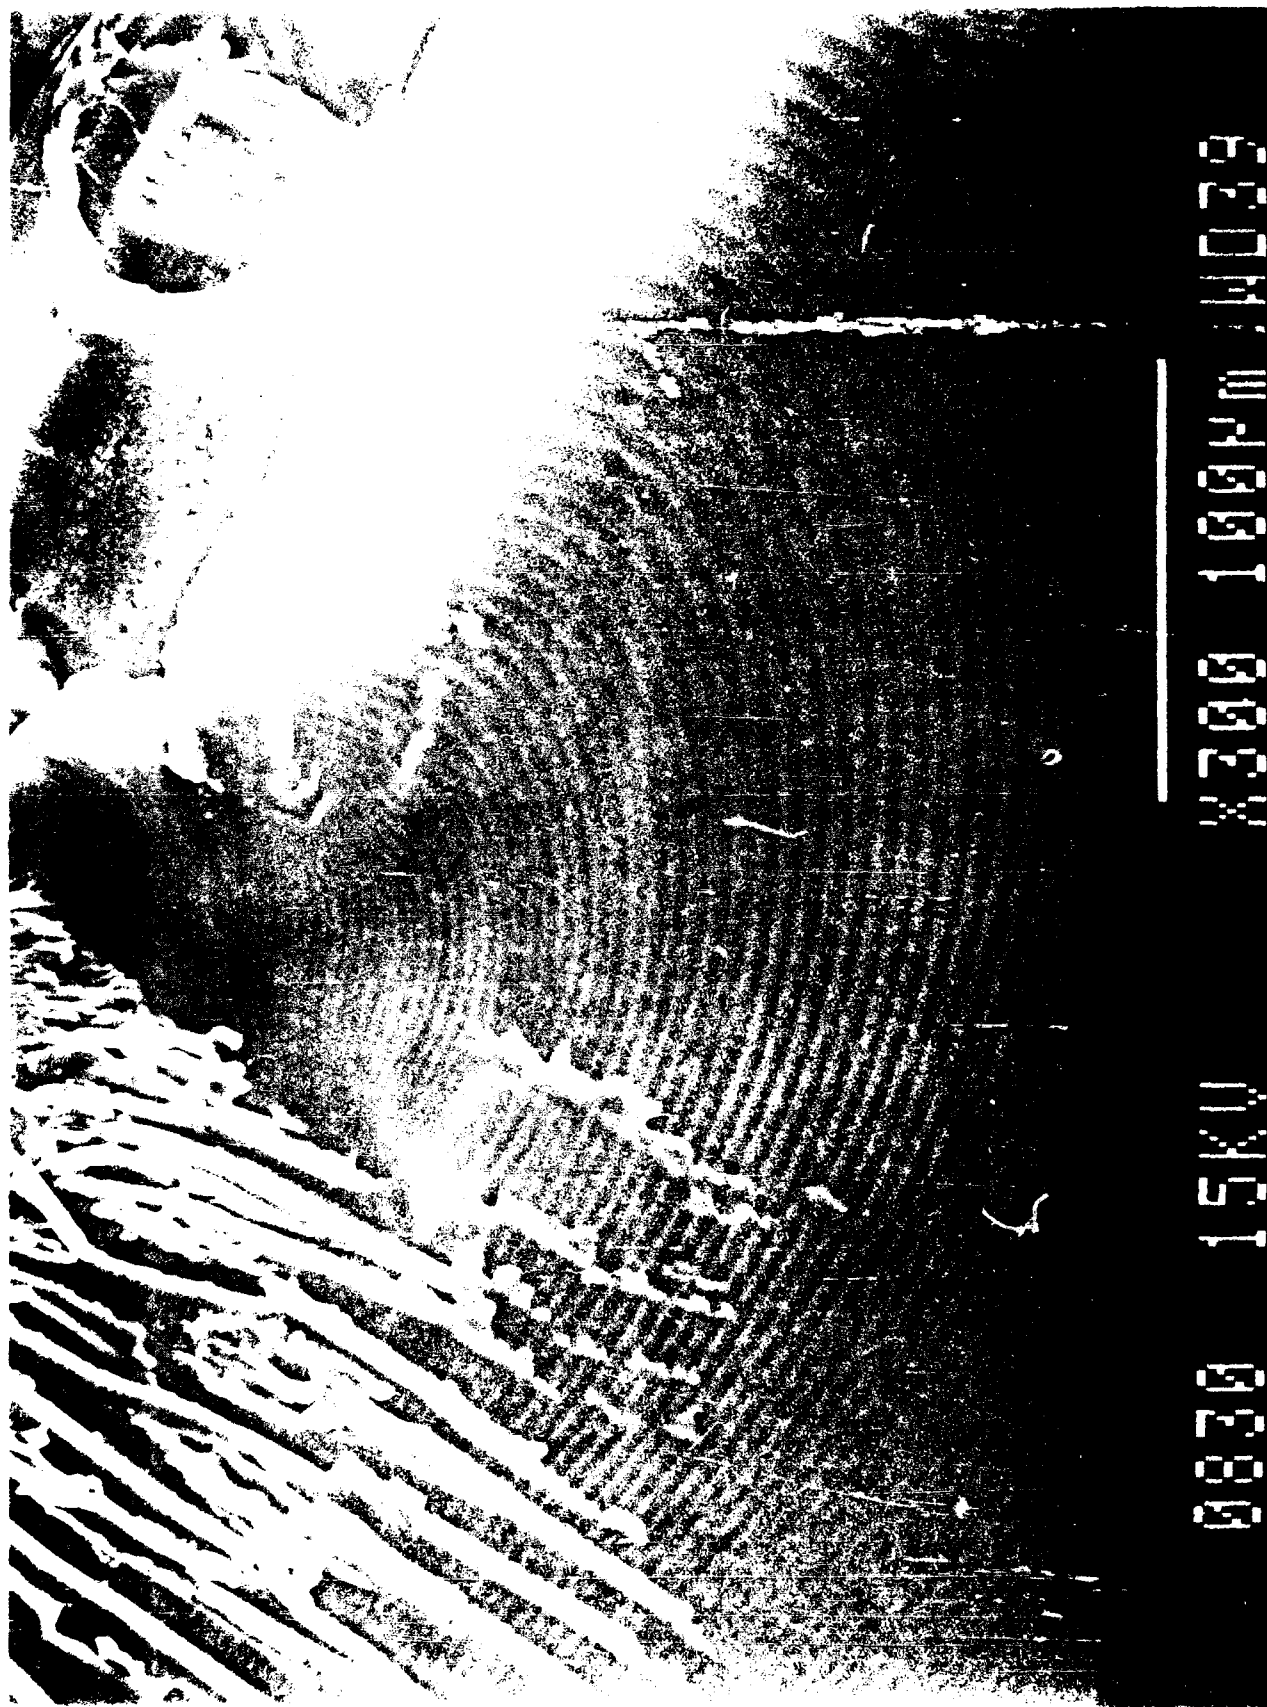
Fatigue Crack Detail PPG Sequence #809, Installed Age Greater Than 5y 1m.
